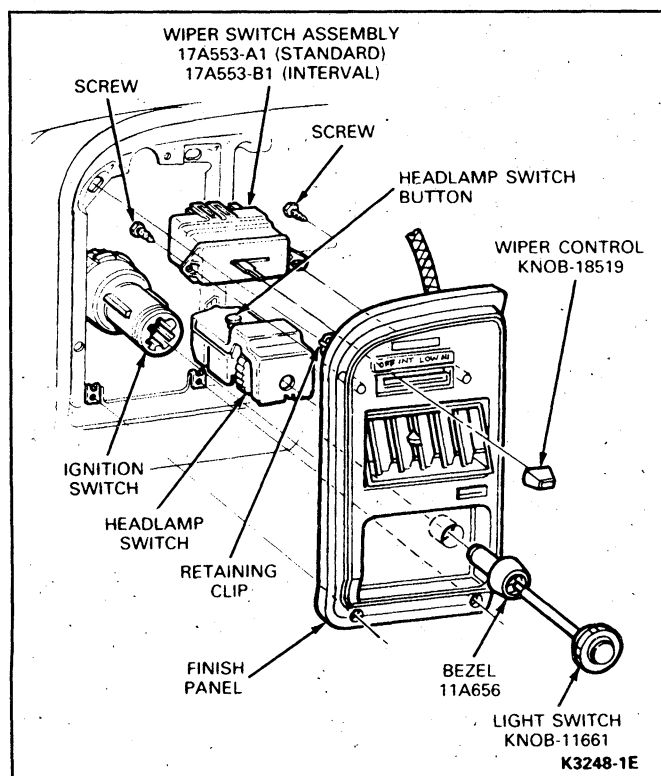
Windshield Wiper Control Switch Installation—E-150—E-350
